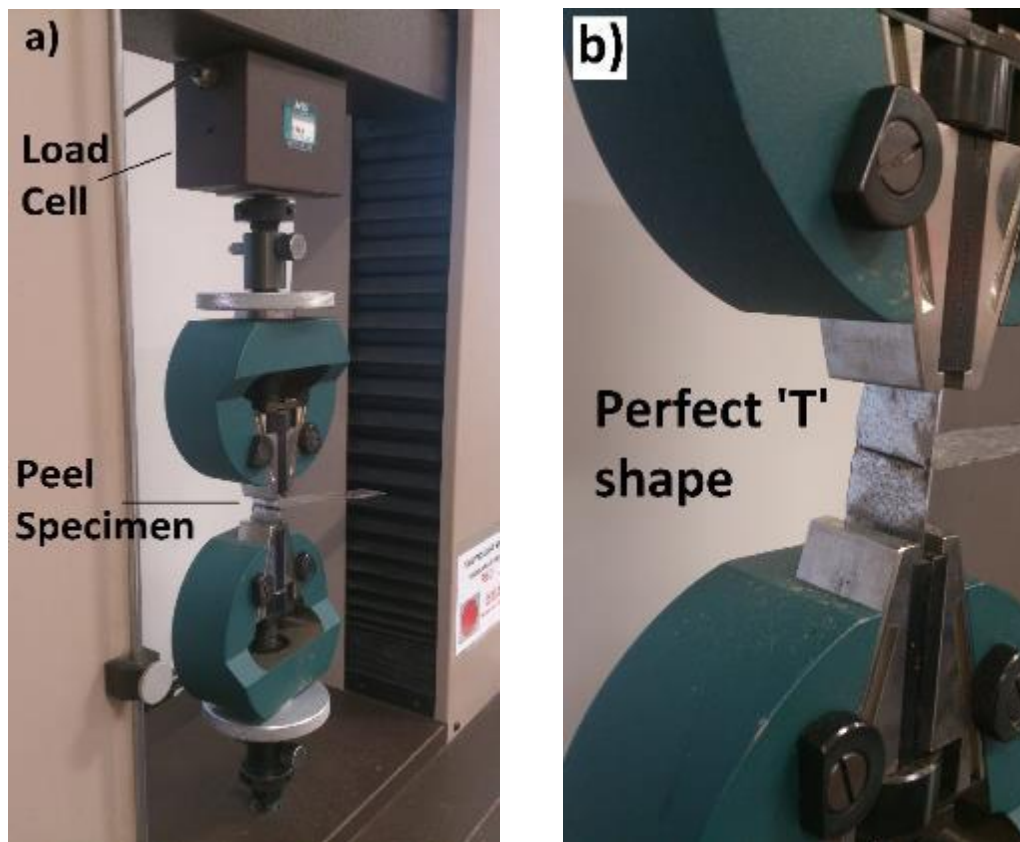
Peel testing of Al specimens: a) Testing apparatus; b) Alignment of the specimen
